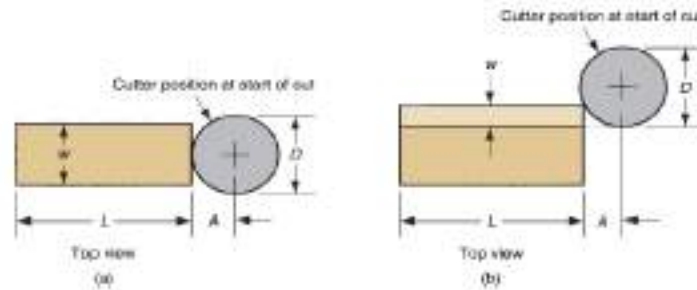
Face milling showing approach and overtravel distance for two cases: (a) when cutter is centered over the workpiece, and (b) when cutter is offset to one side over the work.
